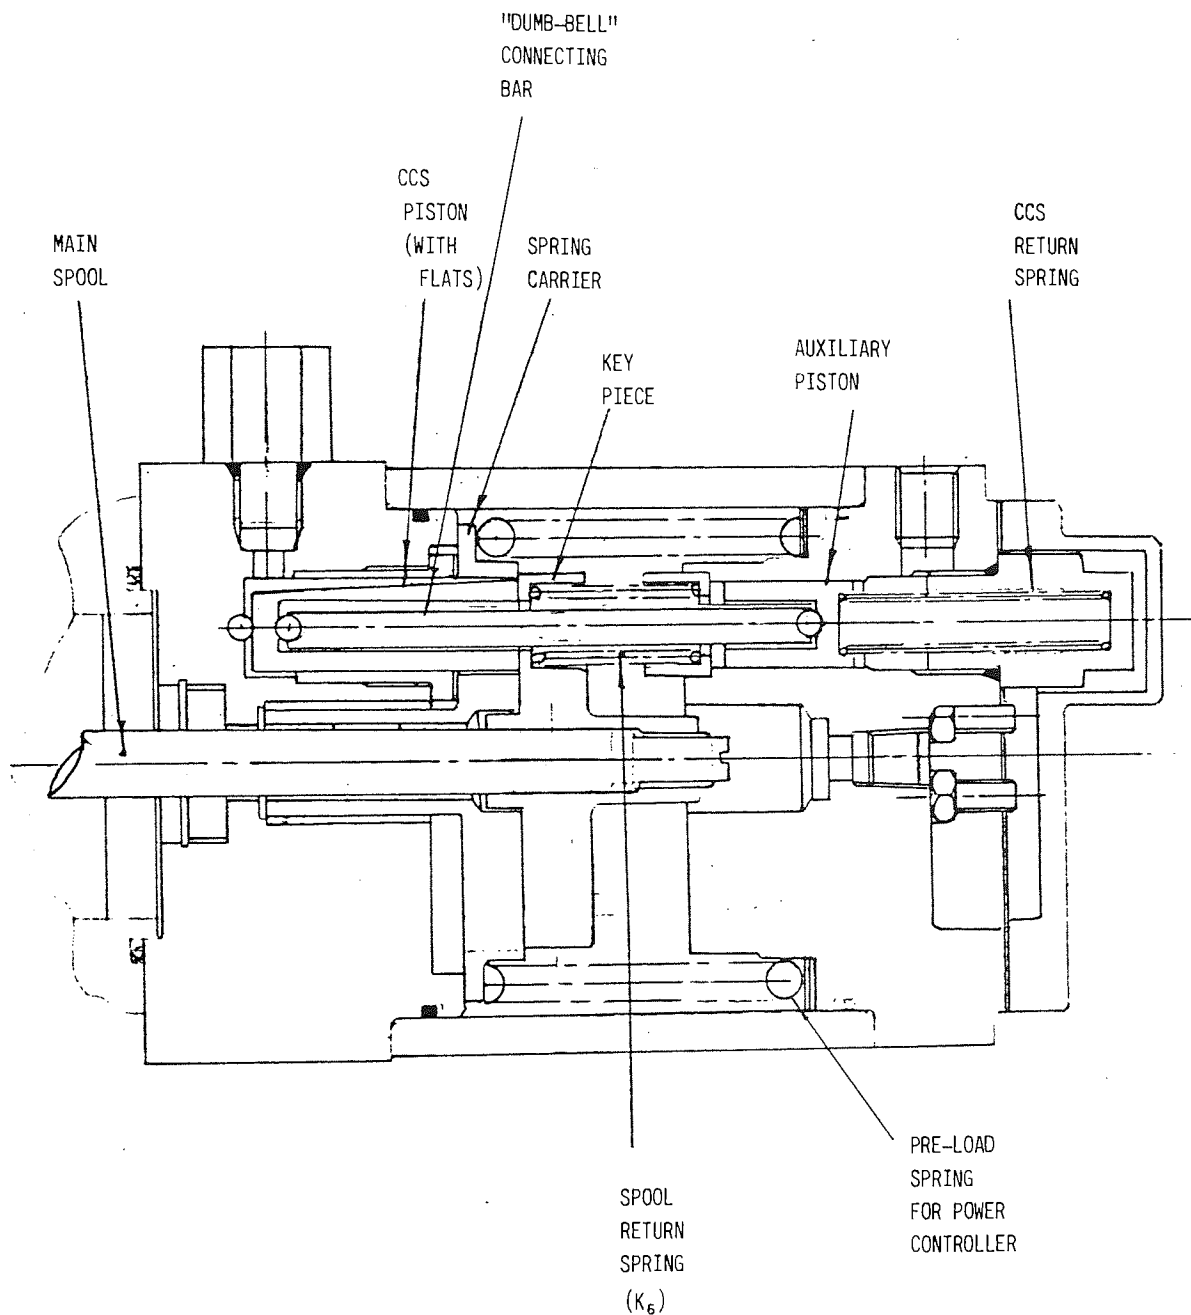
AN ASSEMBLY DRAWING OF THE REVISED CONTROLLER PACKAGE SHOWING THE NEW "DUMB-BELL" CCS PISTON DESIGN
